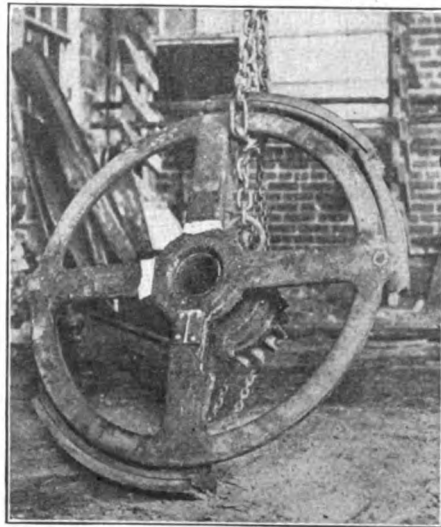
THE CLUTCH WHEEL AS IT CAME TO THE SHOP, SHOWING THE LOCATION OF THE BREAKS AND GEAR THAT WAS REMOVED BEFORE WELDING
